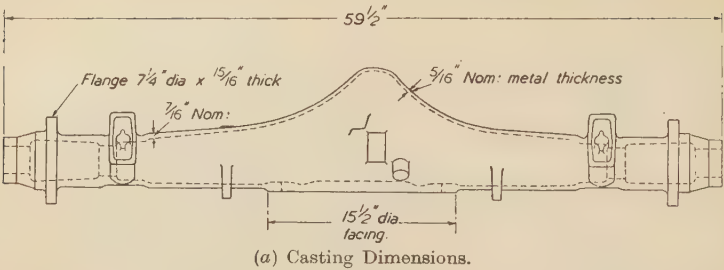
Details of the Automobile Rear-Axle Casings.
